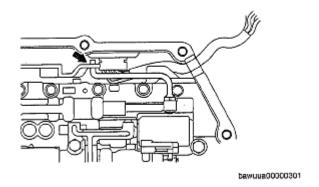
Identifying Control Valve Body Bolts Courtesy of MAZDA MOTORS CORP.
